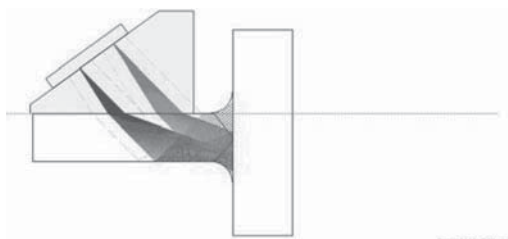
CORNER WELDS (COMBINED S- AND E-SCANS)
